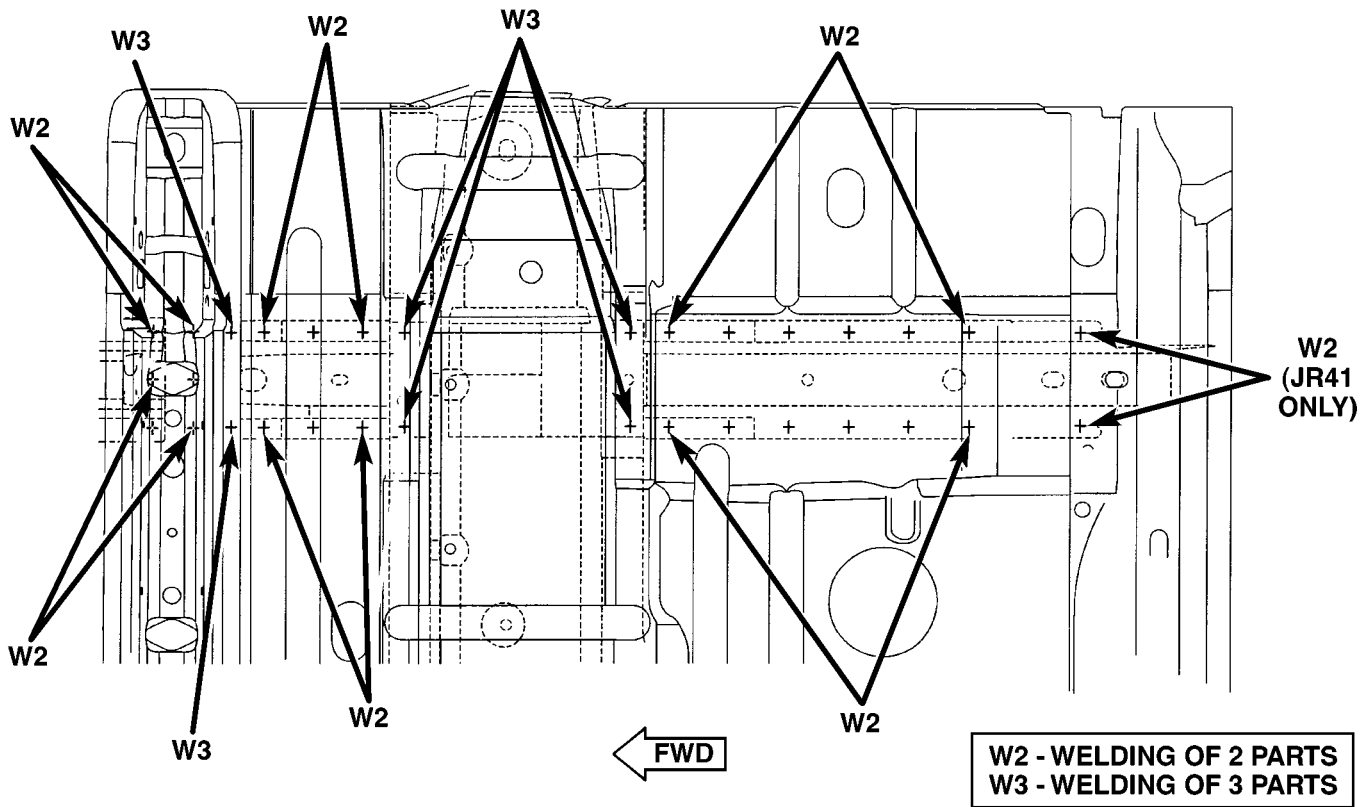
FRONT FLOOR PAN RAIL EXTENSION & REINFORCEMENT TO FRONT FLOOR PAN RAIL
